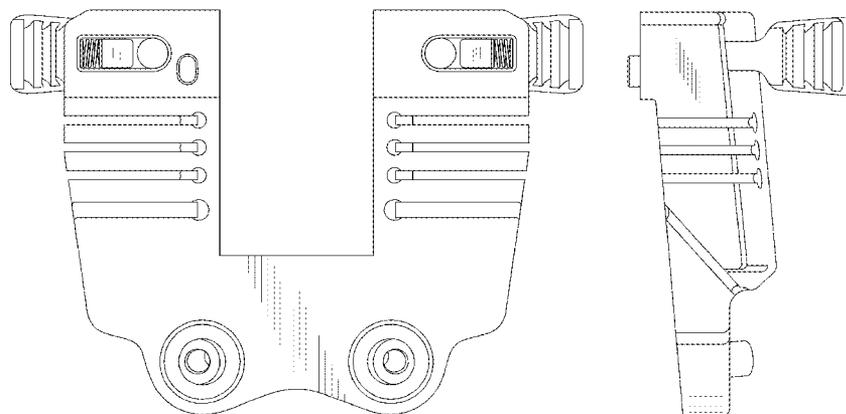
is a bottom plan view of the notch cutting block of FIG.
